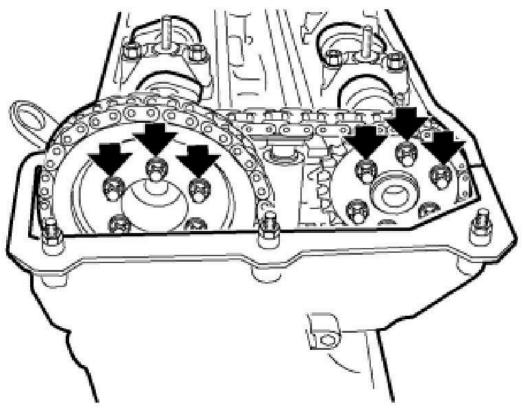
Tightening Exhaust And Inlet Camshafts Screws On Cylinder Bank 1 To 4 Courtesy of BMW OF NORTH AMERICA, INC.
